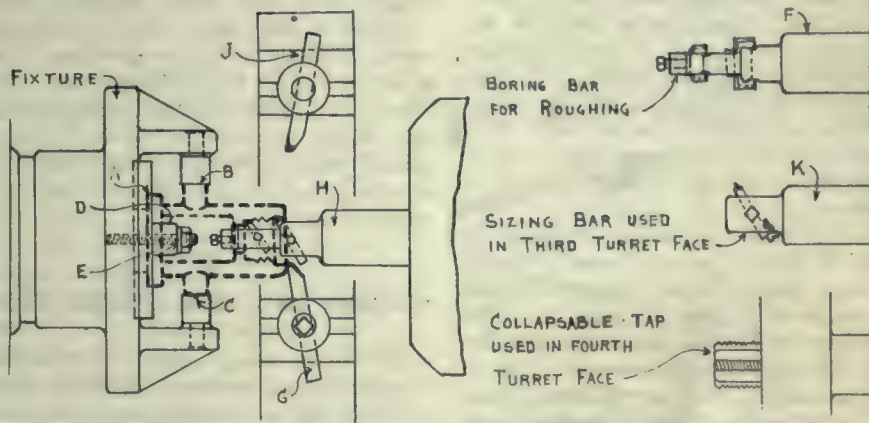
METHOD OF HOLDING WORK WHILE MACHINING AND THREADING OPEN END. AT THE RIGHT ARE SHOWN THE VARIOUS TOOLS USED.
